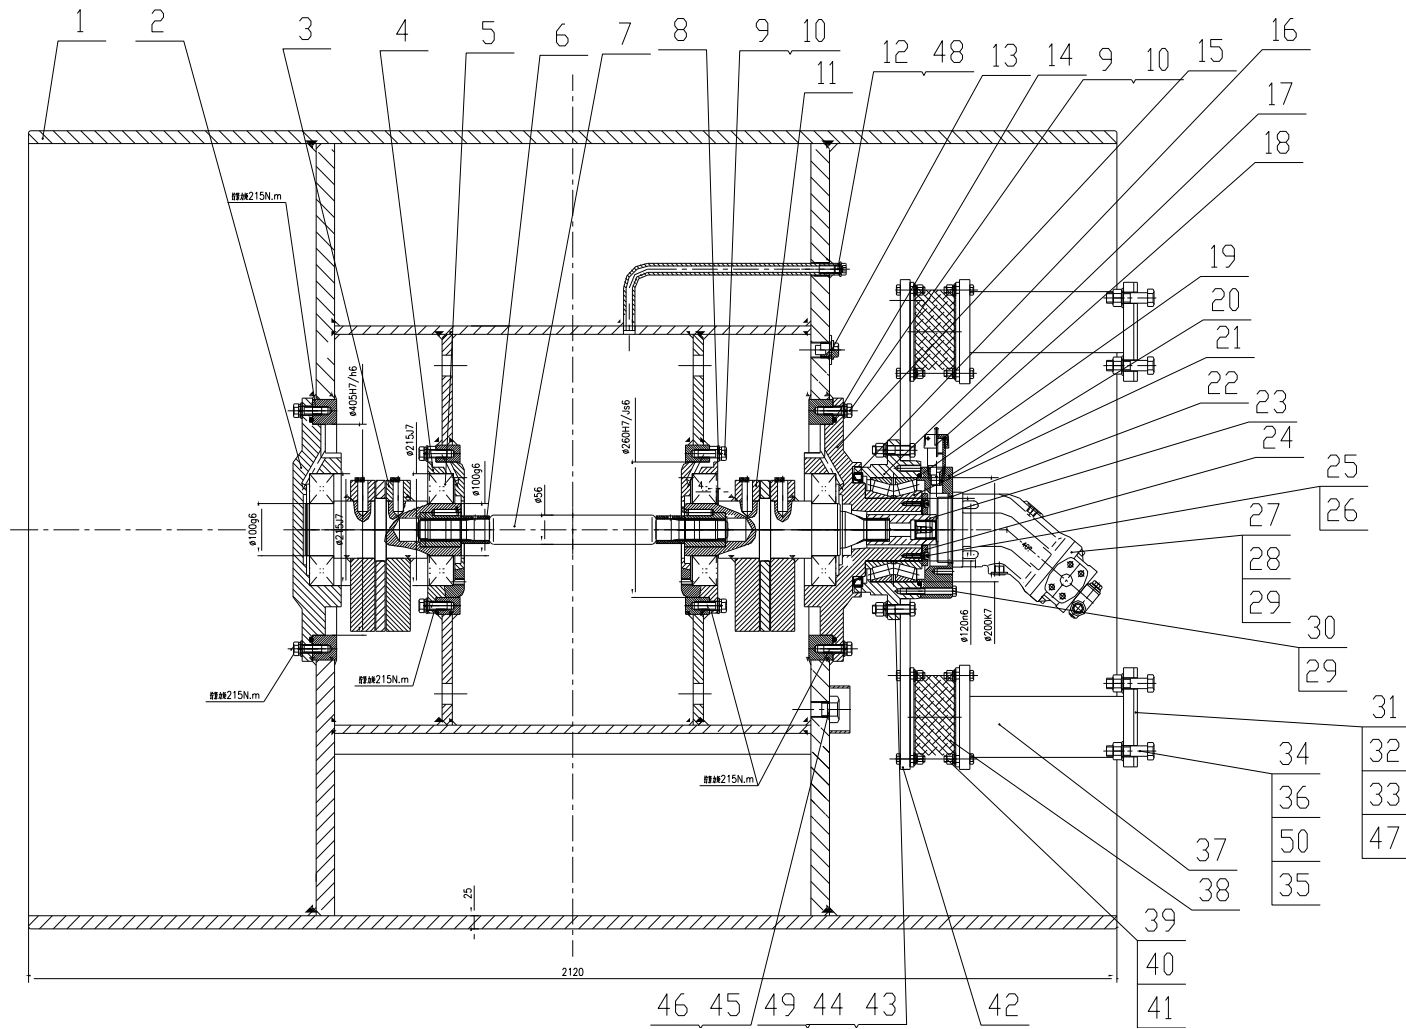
Vibration drum assembly 振动轮总成			Remarks
